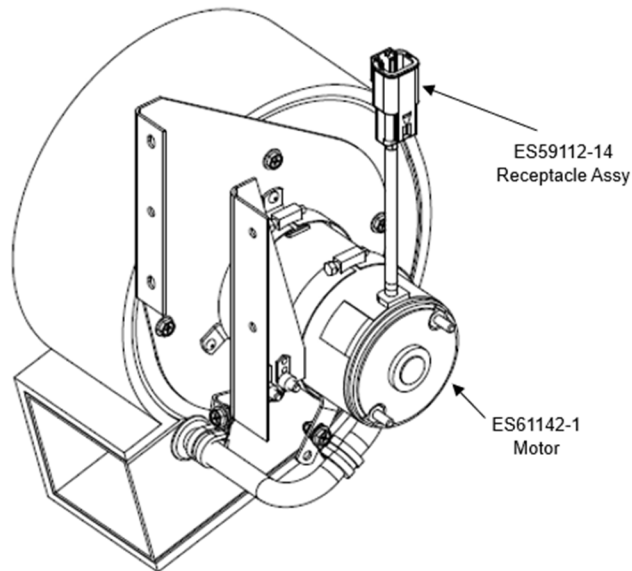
Aft Evaporator Blower Assembly EC135-6844-2
